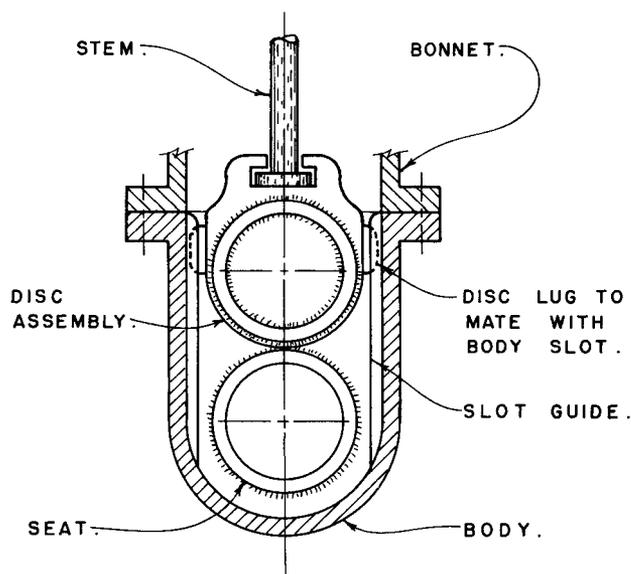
Slot Disc Guides in Gate Valve Body.
